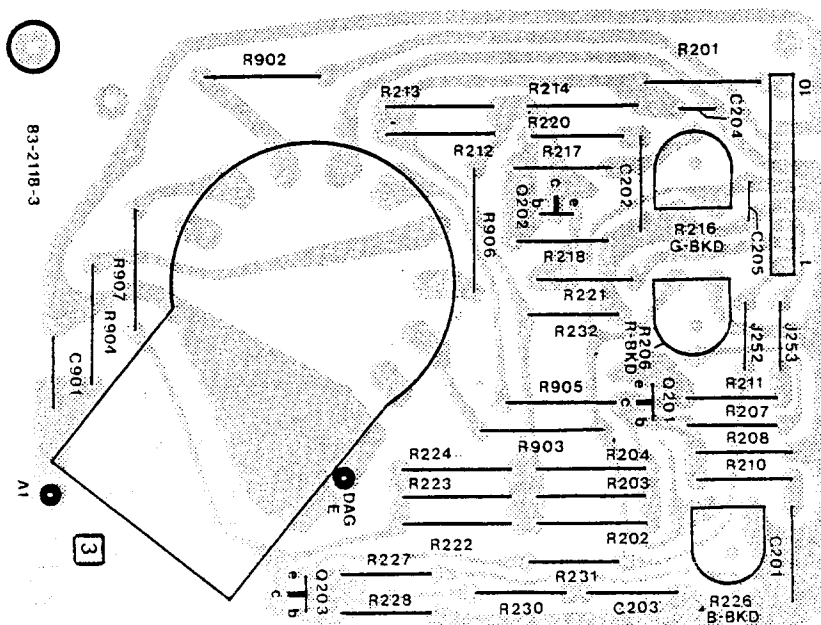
(b) 170 Series Tube Base p.w.b. (standard neck) - component side
